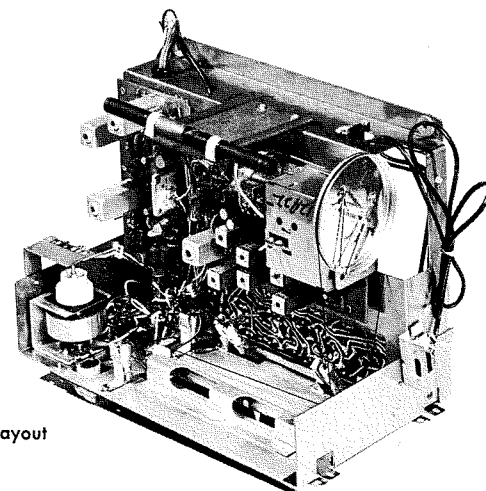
RC-1218 chassis layout and mechanical assembly.
